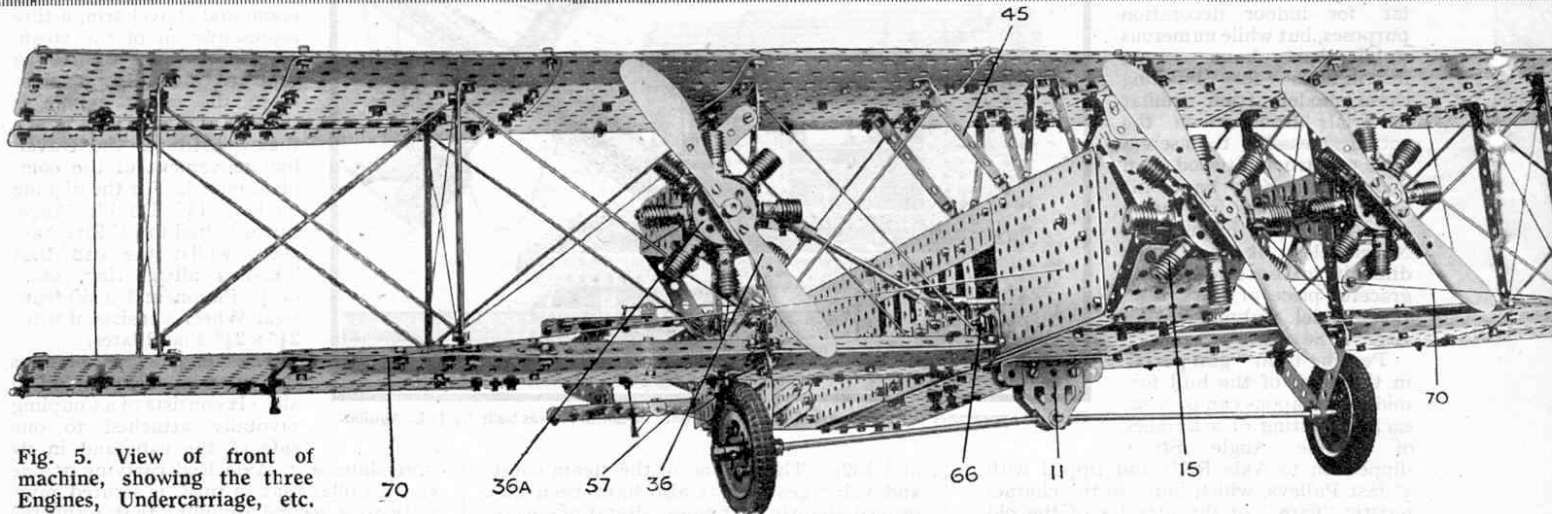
View of front of machine, showing the three Engines, Undercarriage, etc.
